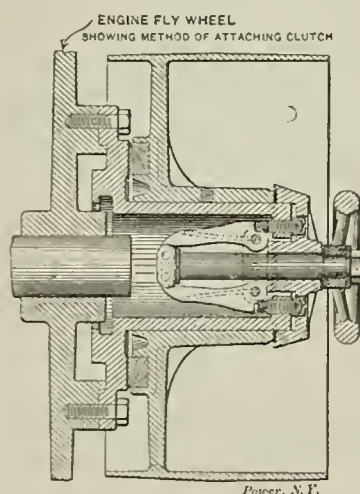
SECTIONAL VIEW OF "B & C" CLUTCH PULLEY.
